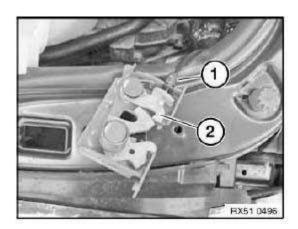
Identifying Bowden Cable And Hood/Bonnet Lock Courtesy of BMW OF NORTH AMERICA, INC.
